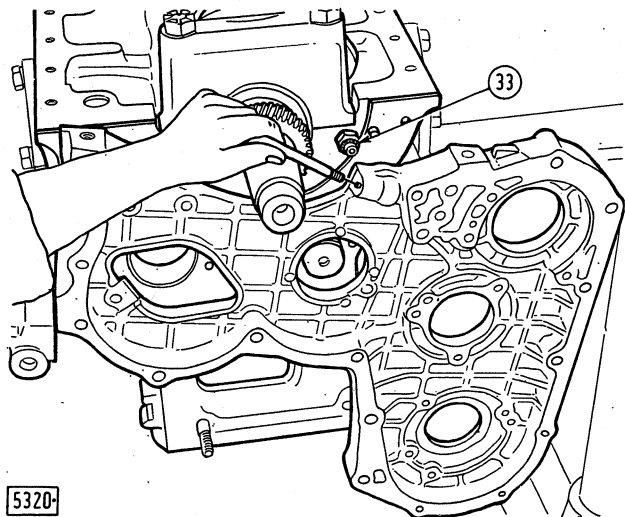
Cleaning the lubrication duct through the timing gear case.
